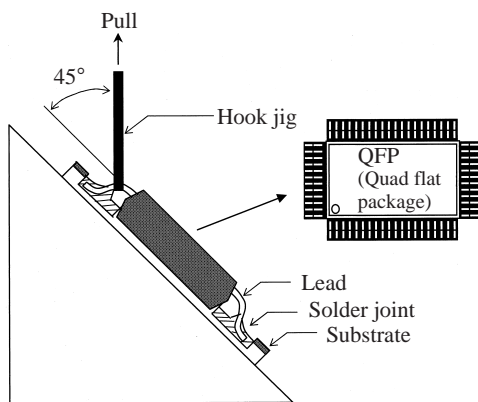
Schematic diagram of method for 45° pull test of solder joints on QFP lead
